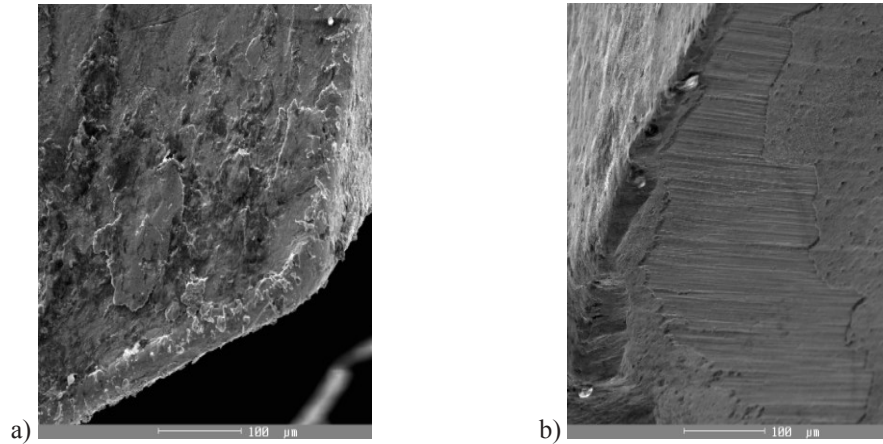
(a) Tool wear – frittering, (b) Tool wear - flaking
